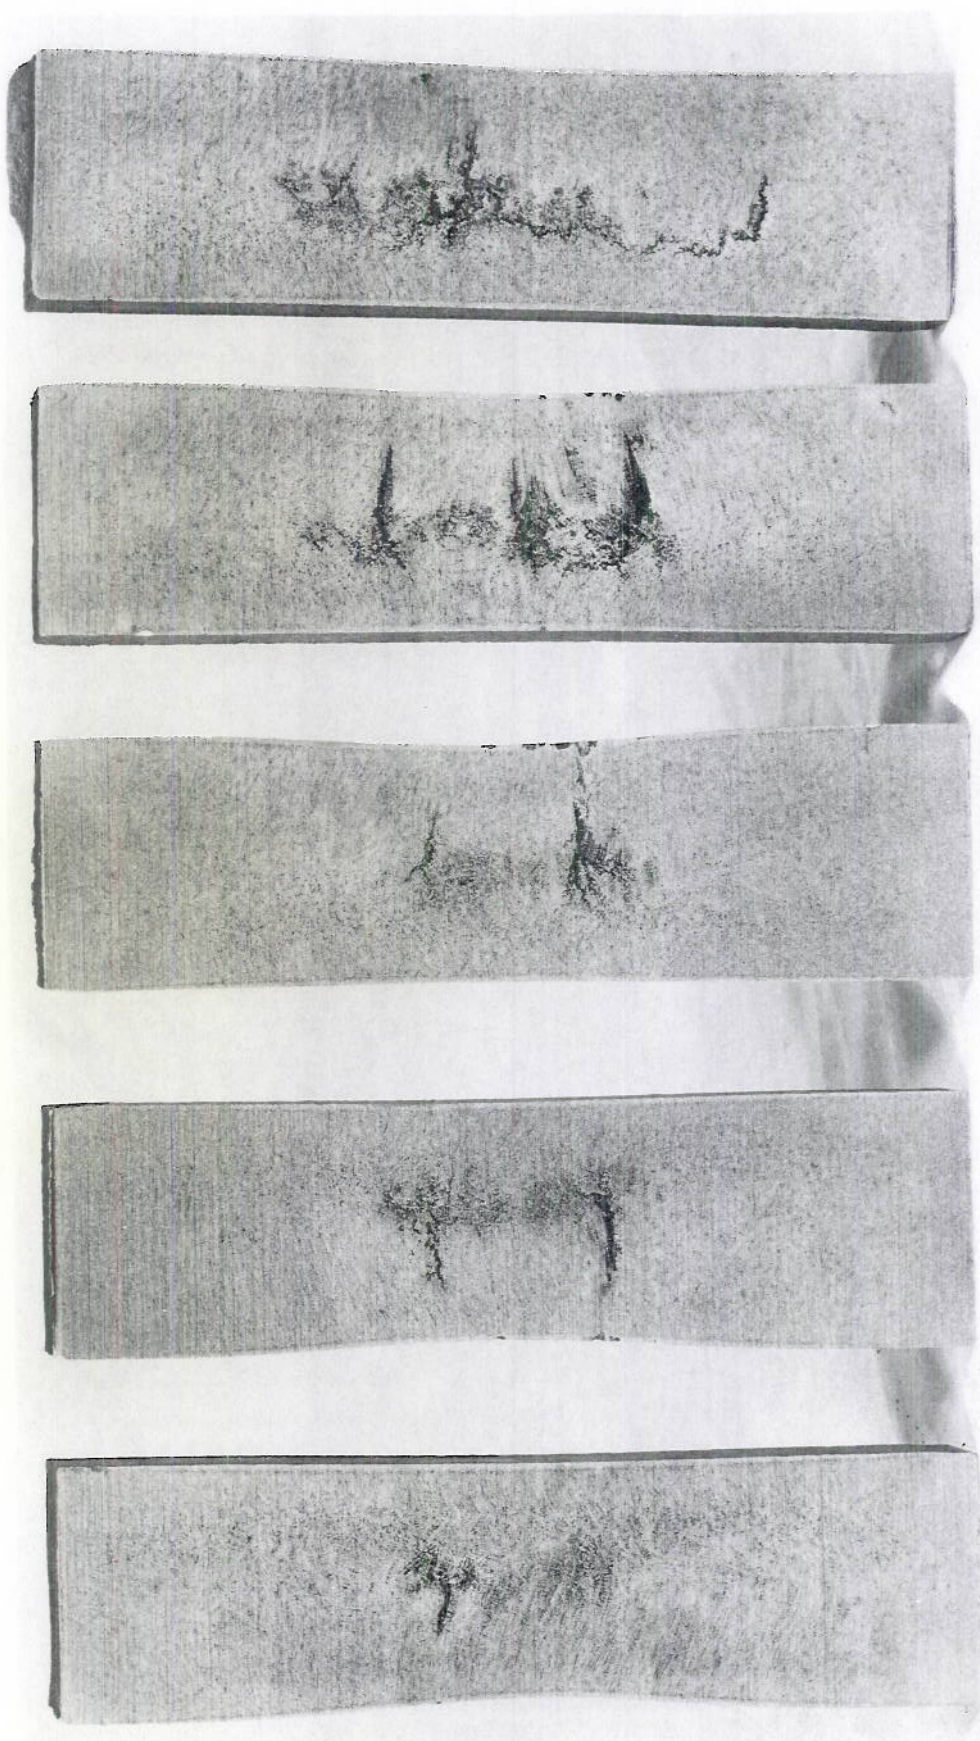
SECTIONS THROUGH INTERNAL HOT TEARS OF FIG. 23.
